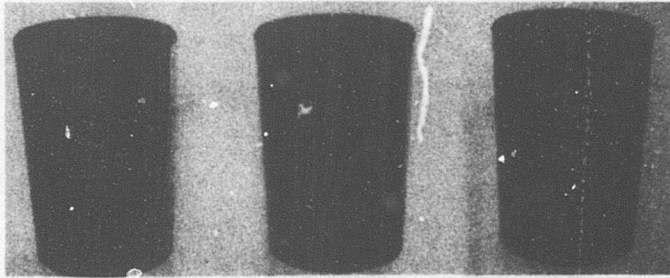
HM926700-Series Bearing After Test, Bearing No. T-8, Test No. 22--Damaged After Running 9 Hours at 11,500 rpm. Damage Due to Bearing End-Play Adjustment Test.
